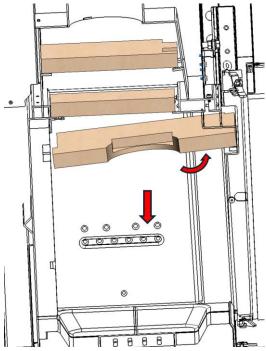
Removing the lower right deflector (side opposite the side glass)
